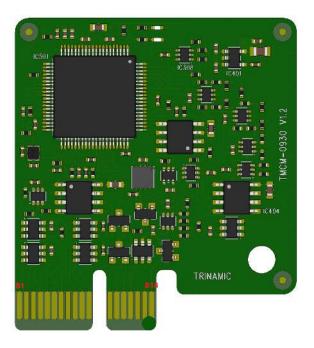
Front side of TMCM-0930 with marked copper pads B1-B18
